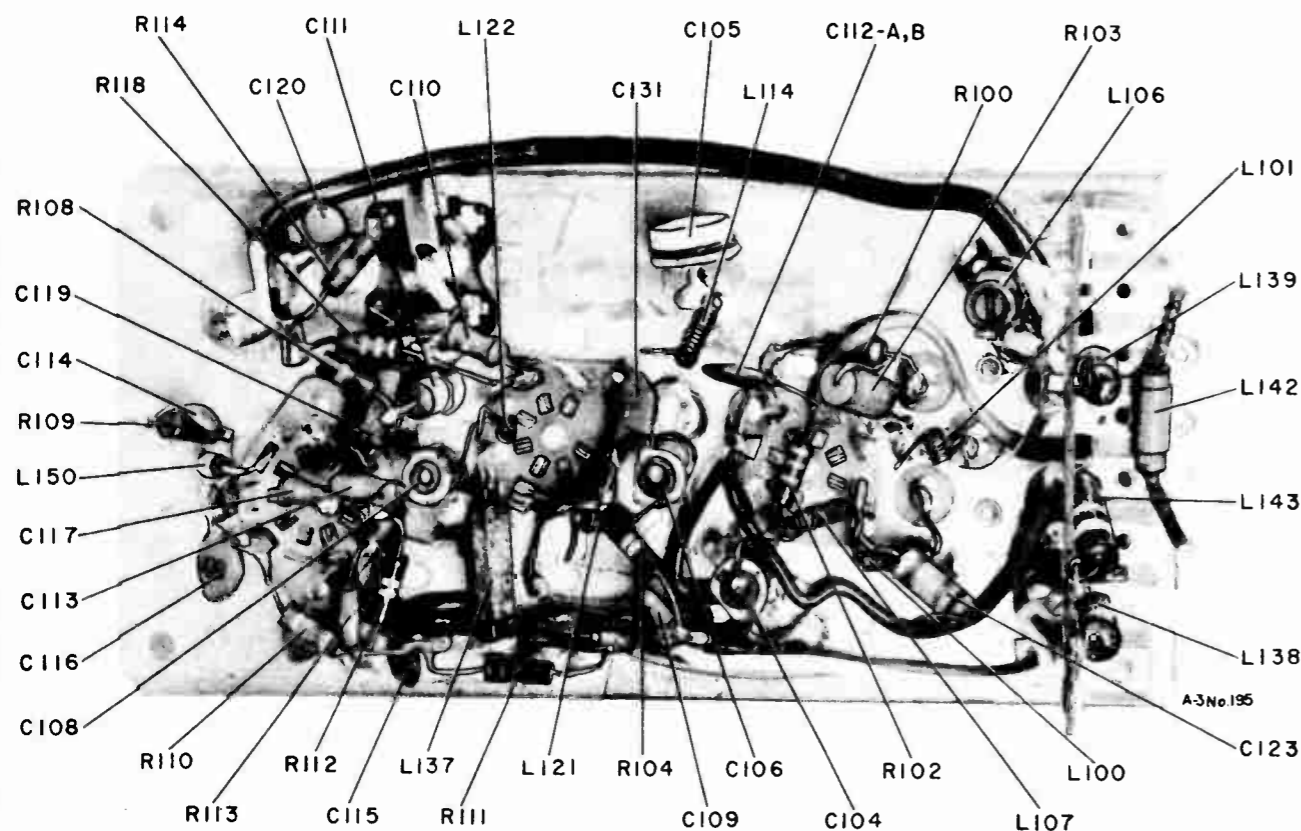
R-F Tuner, Bottom View, Switch Removed
